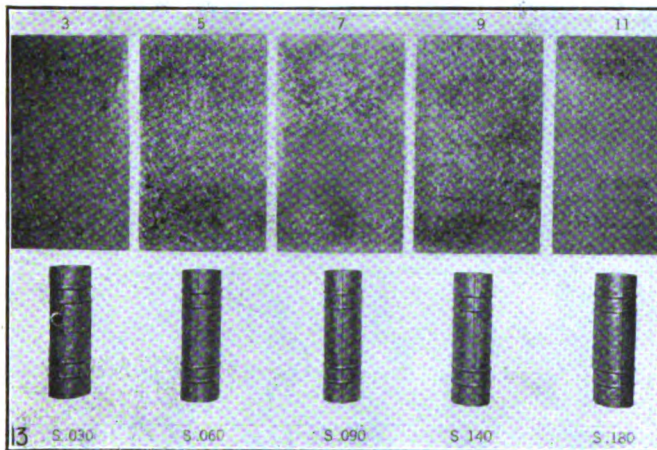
SHEET STEEL GALVANIZED AND FORMED
